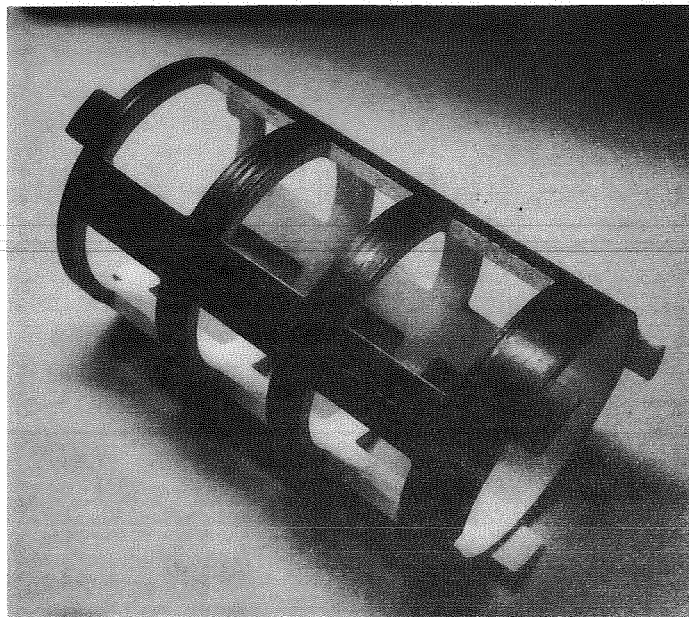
Prototype E.P.S. system transducer coil assembly
